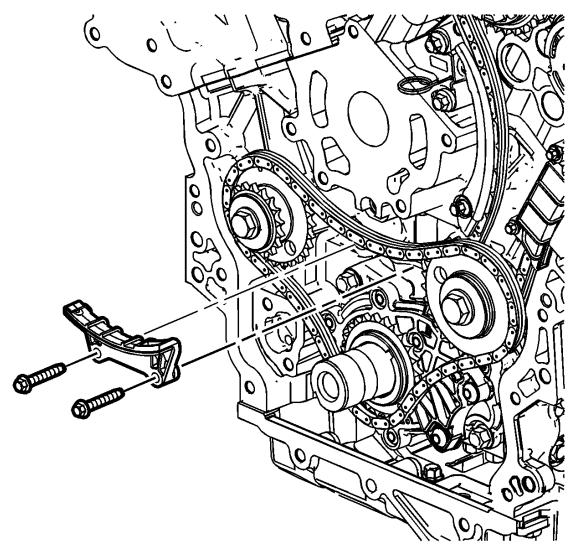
View Of Upper Primary Camshaft Drive Chain Guide Courtesy of GENERAL MOTORS COMPANY
